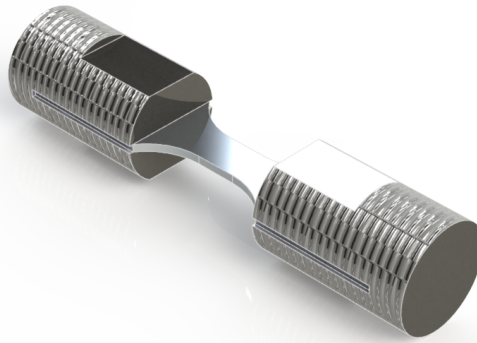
Adhesively bonded specimen with threaded metallic grips
